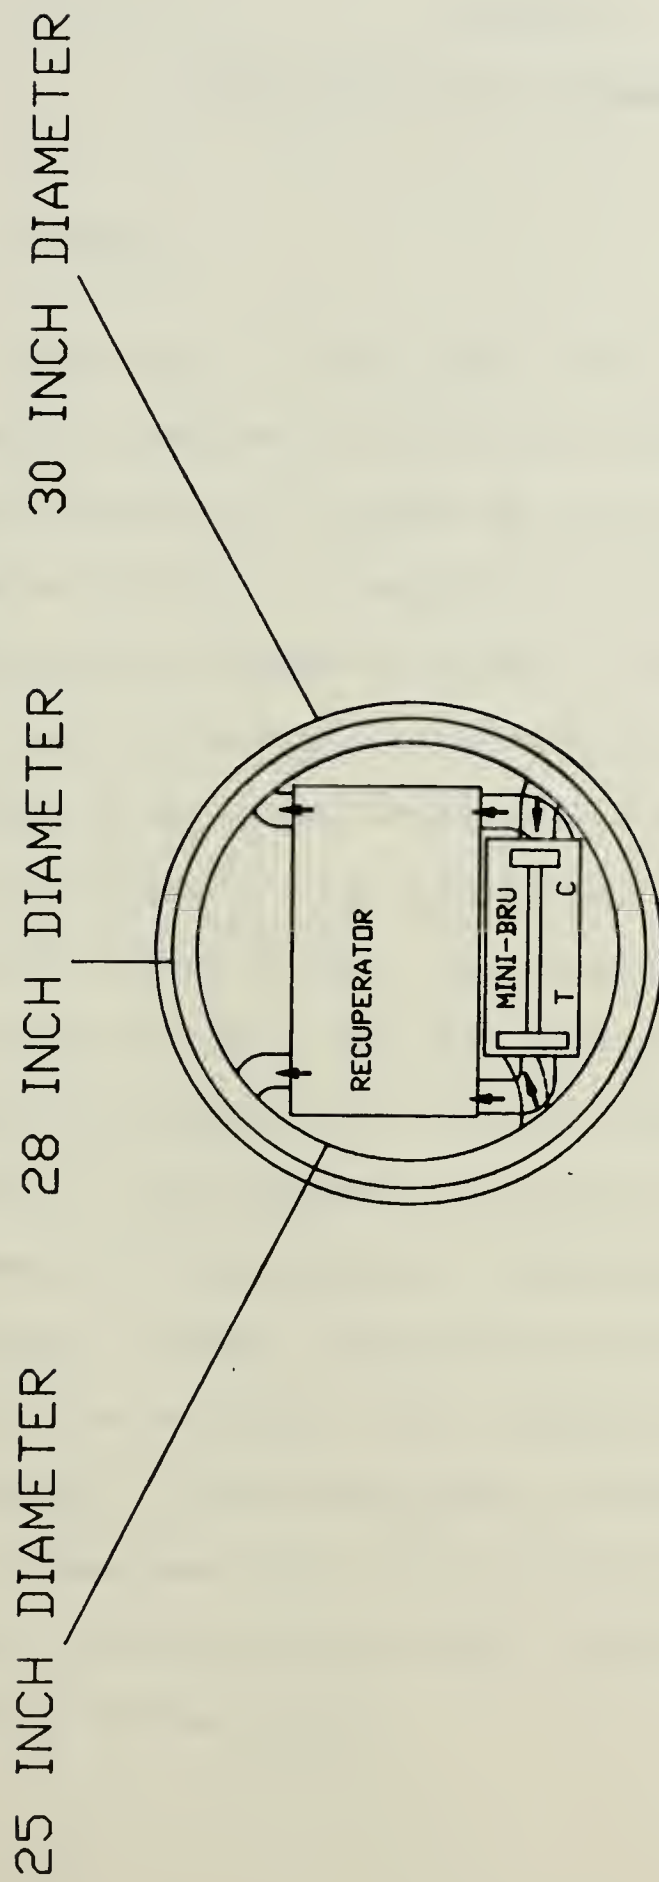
CROSS-SECTIONAL VIEW OF A 30 INCH DIAMETER VEHICLE
